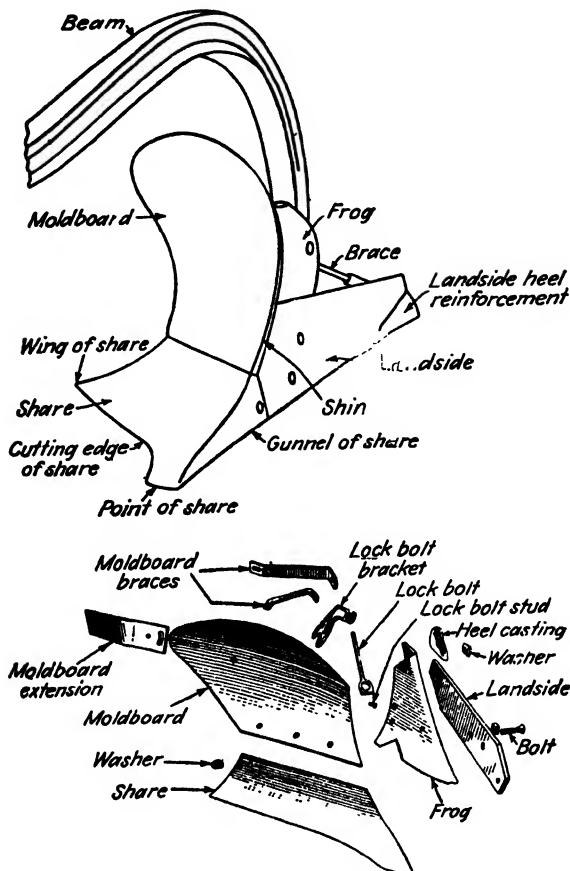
Assembled and exploded view of moldboard plow bottom and parts.
